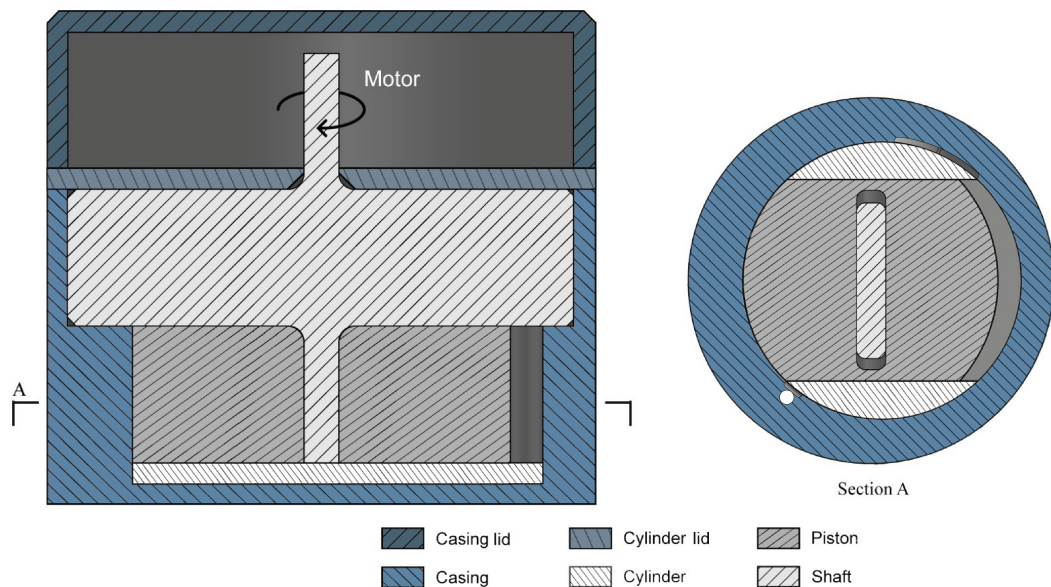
Front and top cross-sectional view of a shaft-actuated compressor with shaft rotary bearing.
